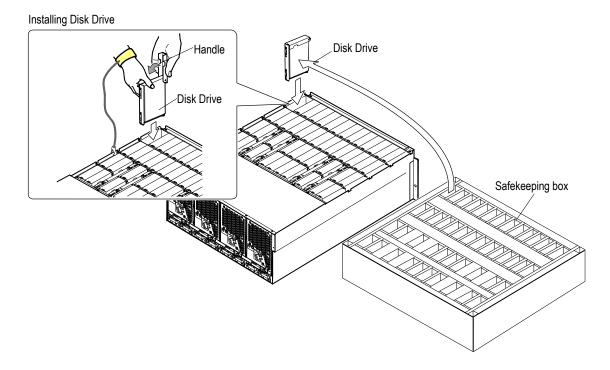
Installing the Disk Drive/Dummy (Disk Drive)
